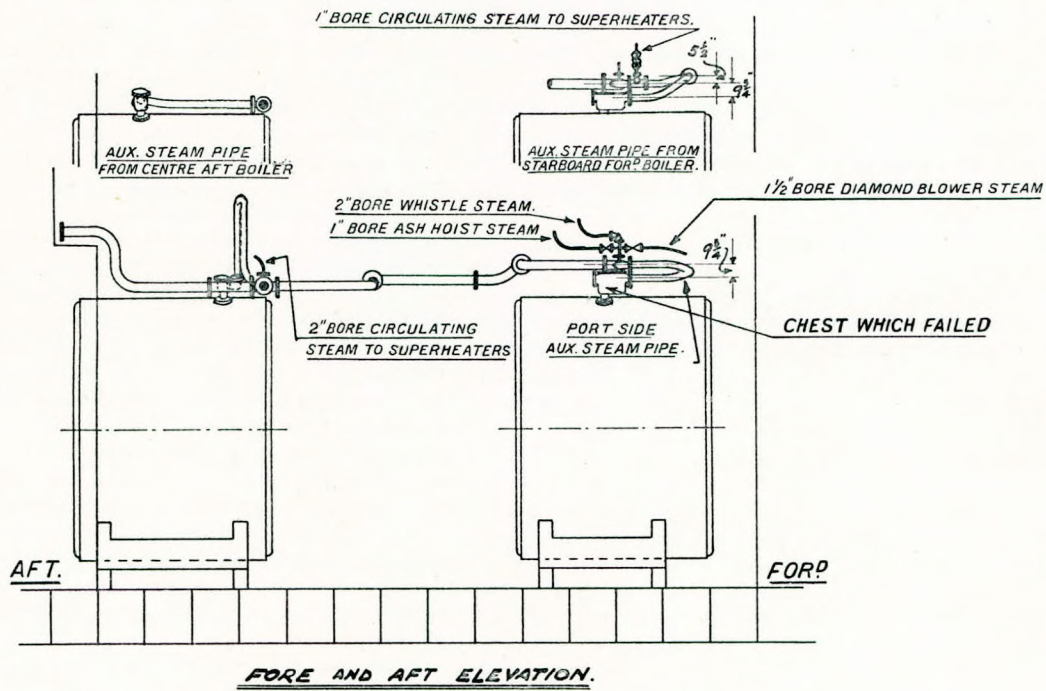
Arrangement of auxiliary steam pipes on boilers.
